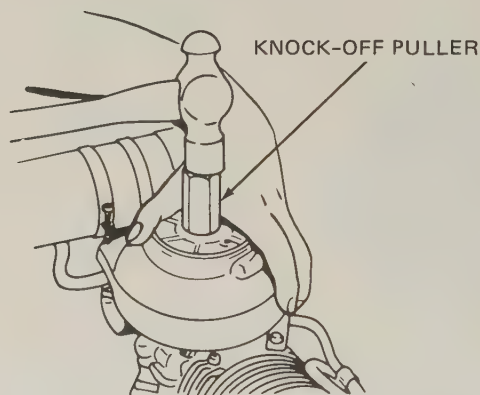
Using a special flywheel knockout puller to loosen the flywheel from the shaft. (Tecumseh Products Company)
